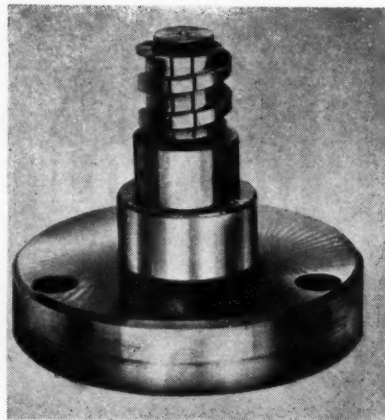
Grinding Fixture with Expanding Mandrel Developed by Erickson Tools Division
